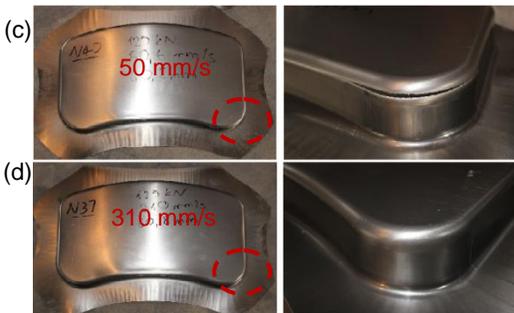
Results of deep drawing tests with dry film lubricant under different constant forming speeds, stroke 60.8 mm: (c) 50 mm/s, crack at right corner, (d) 310 mm/s, defect free formed part
